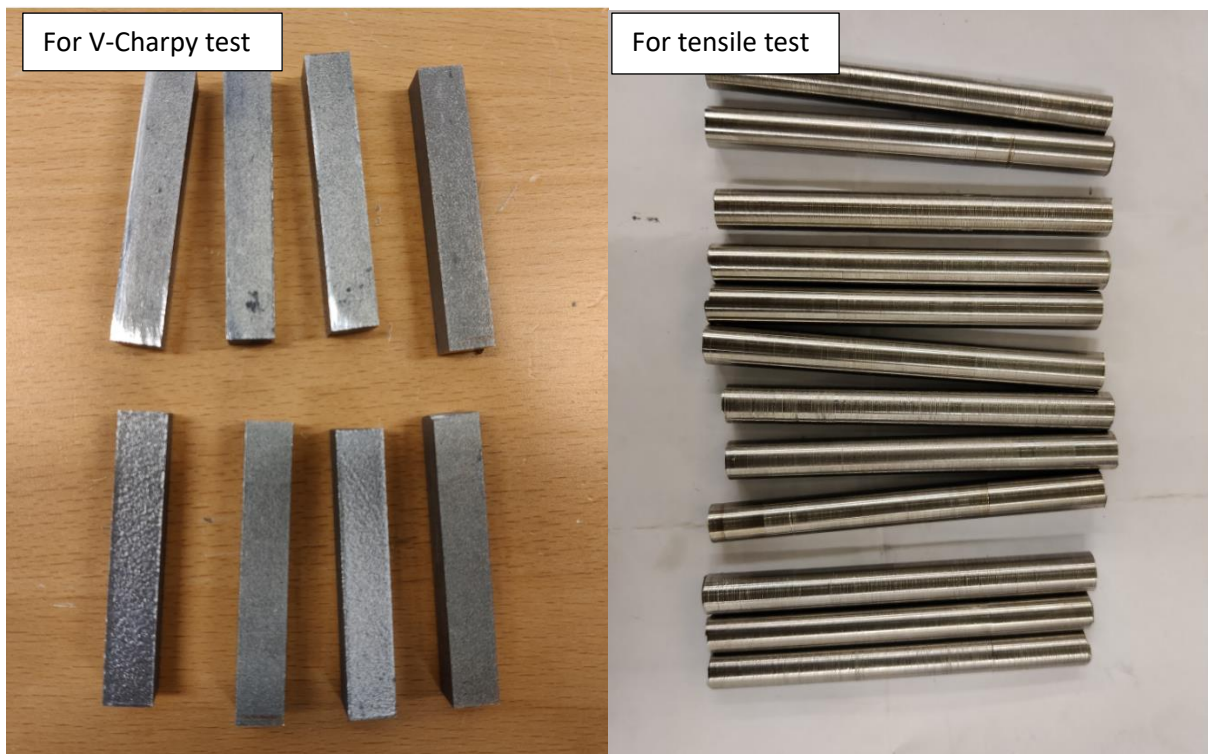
As-printed samples using SLM technique for V-Charpy and tensile test
